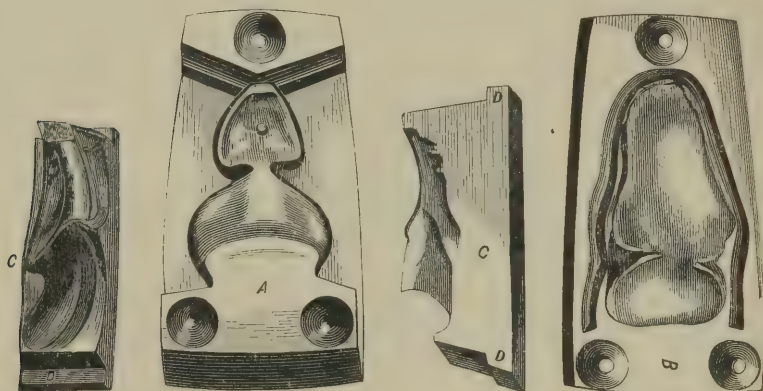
shows a mold in four pieces. The blocks, C C, are accurately adapted to the body of the mold, marked A, and are prevented from coming improperly in contact with each other by the flanges, D D, which overlap the rest upon the sides of the main piece. B shows the top of the mold, and the groove, E, provides for the surplus rubber in packing.
